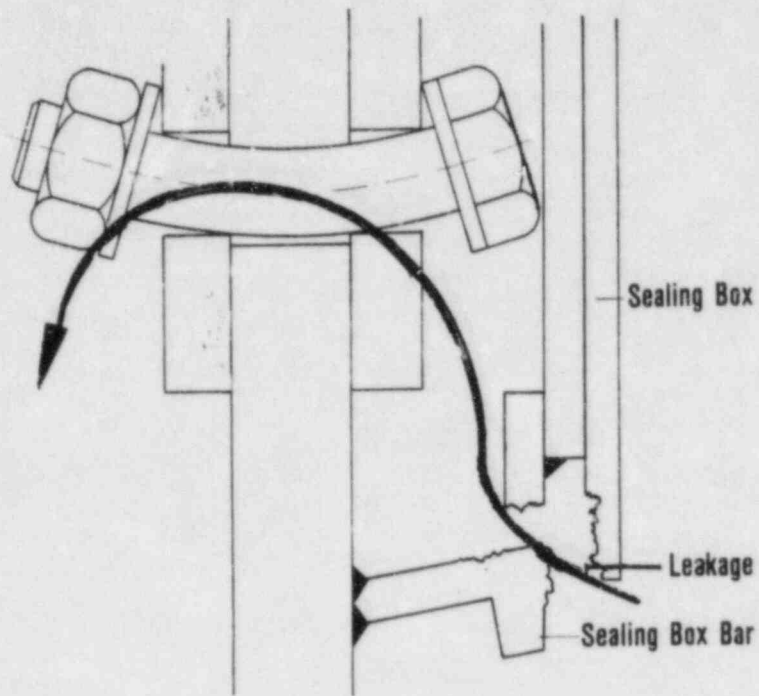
Failure of Sealing Box, Leakage Through the Bolted Connection
